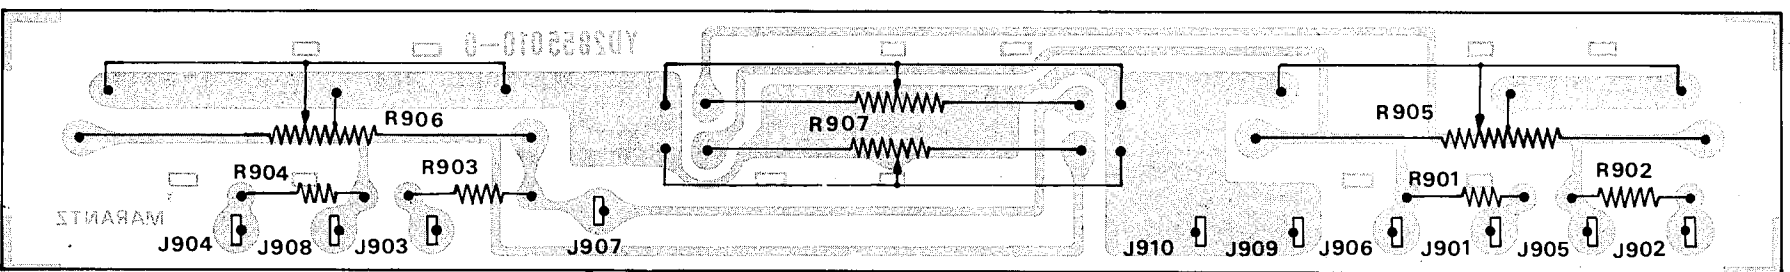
Balance Variable Resistor Unit Assembly P900 Component Locations
